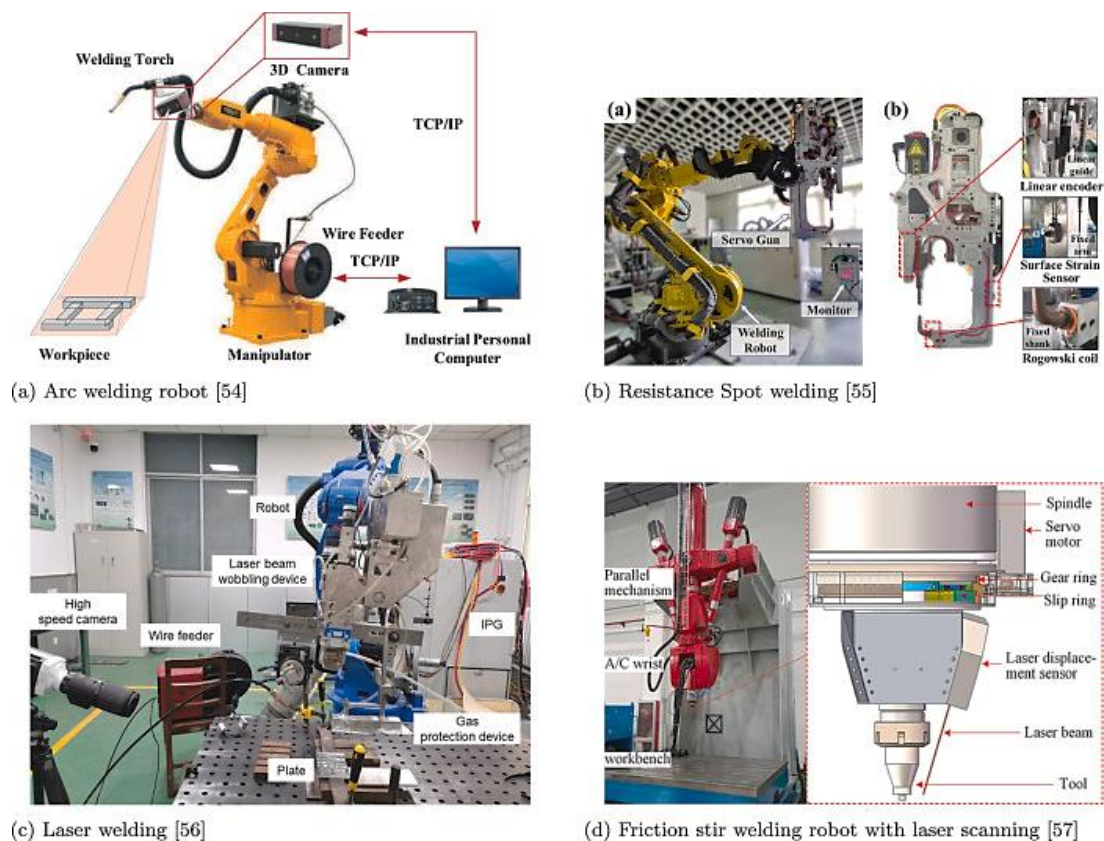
Robotic technology utilized in four common processes of welding, [14].
